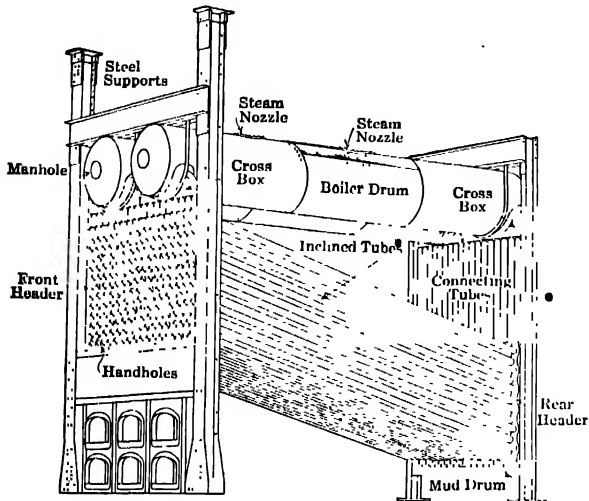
Babcock and Wilcox Boiler Assembly — Longitudinal Drum Type. (Vertical Header.)
